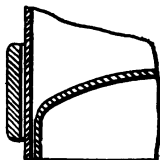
Method of using heat-absorbing plate to reduce tensions during the operation of welding on a head.
